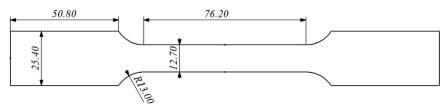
Schematic of the tensile specimen geometry: dimensions in millimeters.
